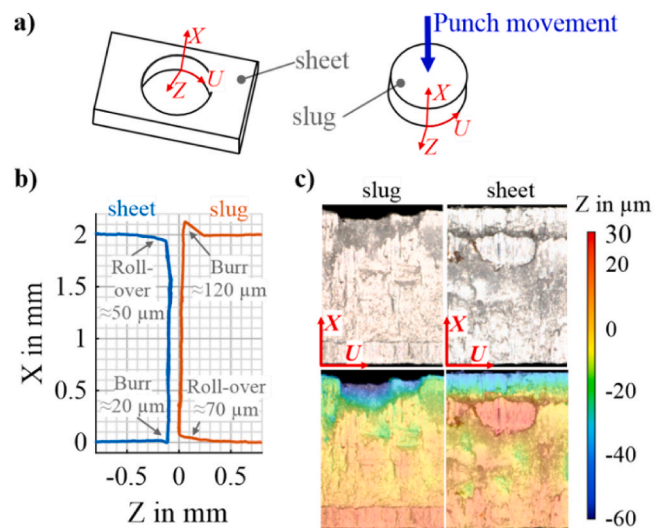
Edge characteristics for 22MnB5-PH of slow-speed blanking at 5% relative clearance c_r : a) Coordinate System, b) 2D-Edge profile, and c) Image and 3D-height-profile of fracture surface.
